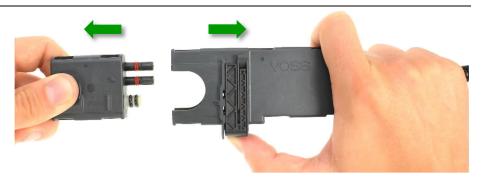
Separation of plug and coupling side of QC system 301 EFSP2
